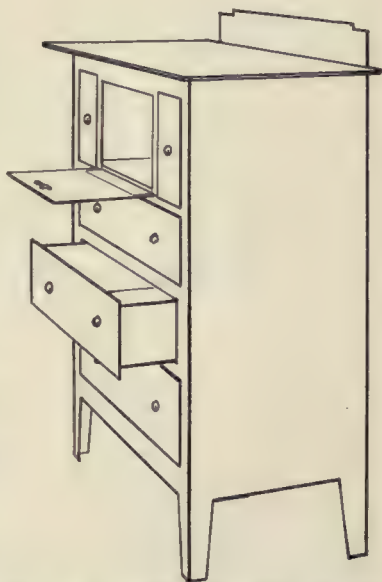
A. CHIFFONNIER WITH DRAWERS AND HINGED DOOR. THE DOOR AND ONE DRAWER ARE OPEN TO SHOW CONSTRUCTION.
